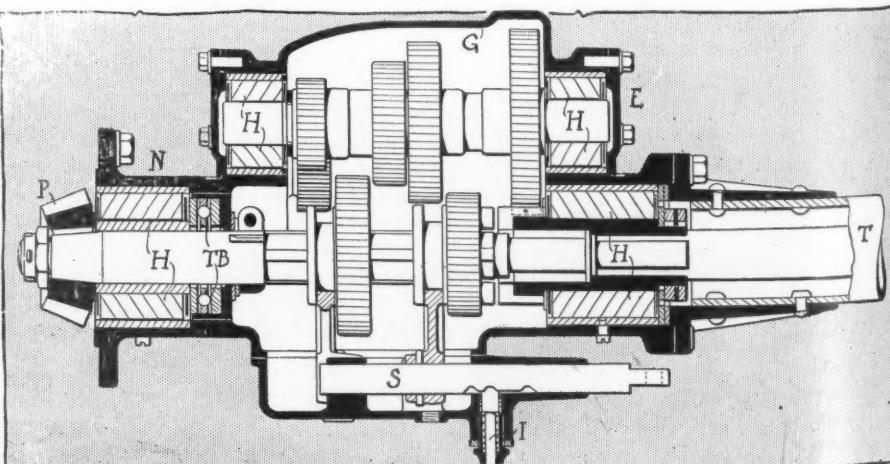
THE REGAL SELECTIVE GEARSET NOW USES HYATT ROLLER BEARINGS
